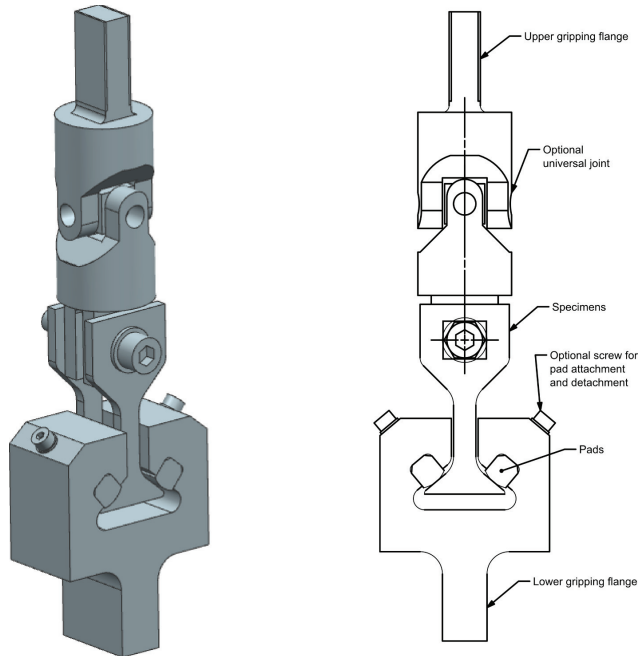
Dovetail fixture arrangement. A universal joint is used to make the test rig self-align when the axial loads are applied, providing symmetric loads to the specimens.
